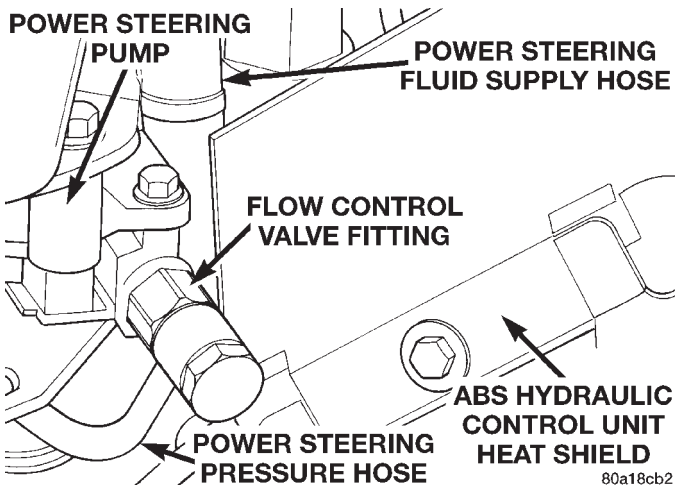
Power Steering Fluid Pressure Hose Attachment To Pump
